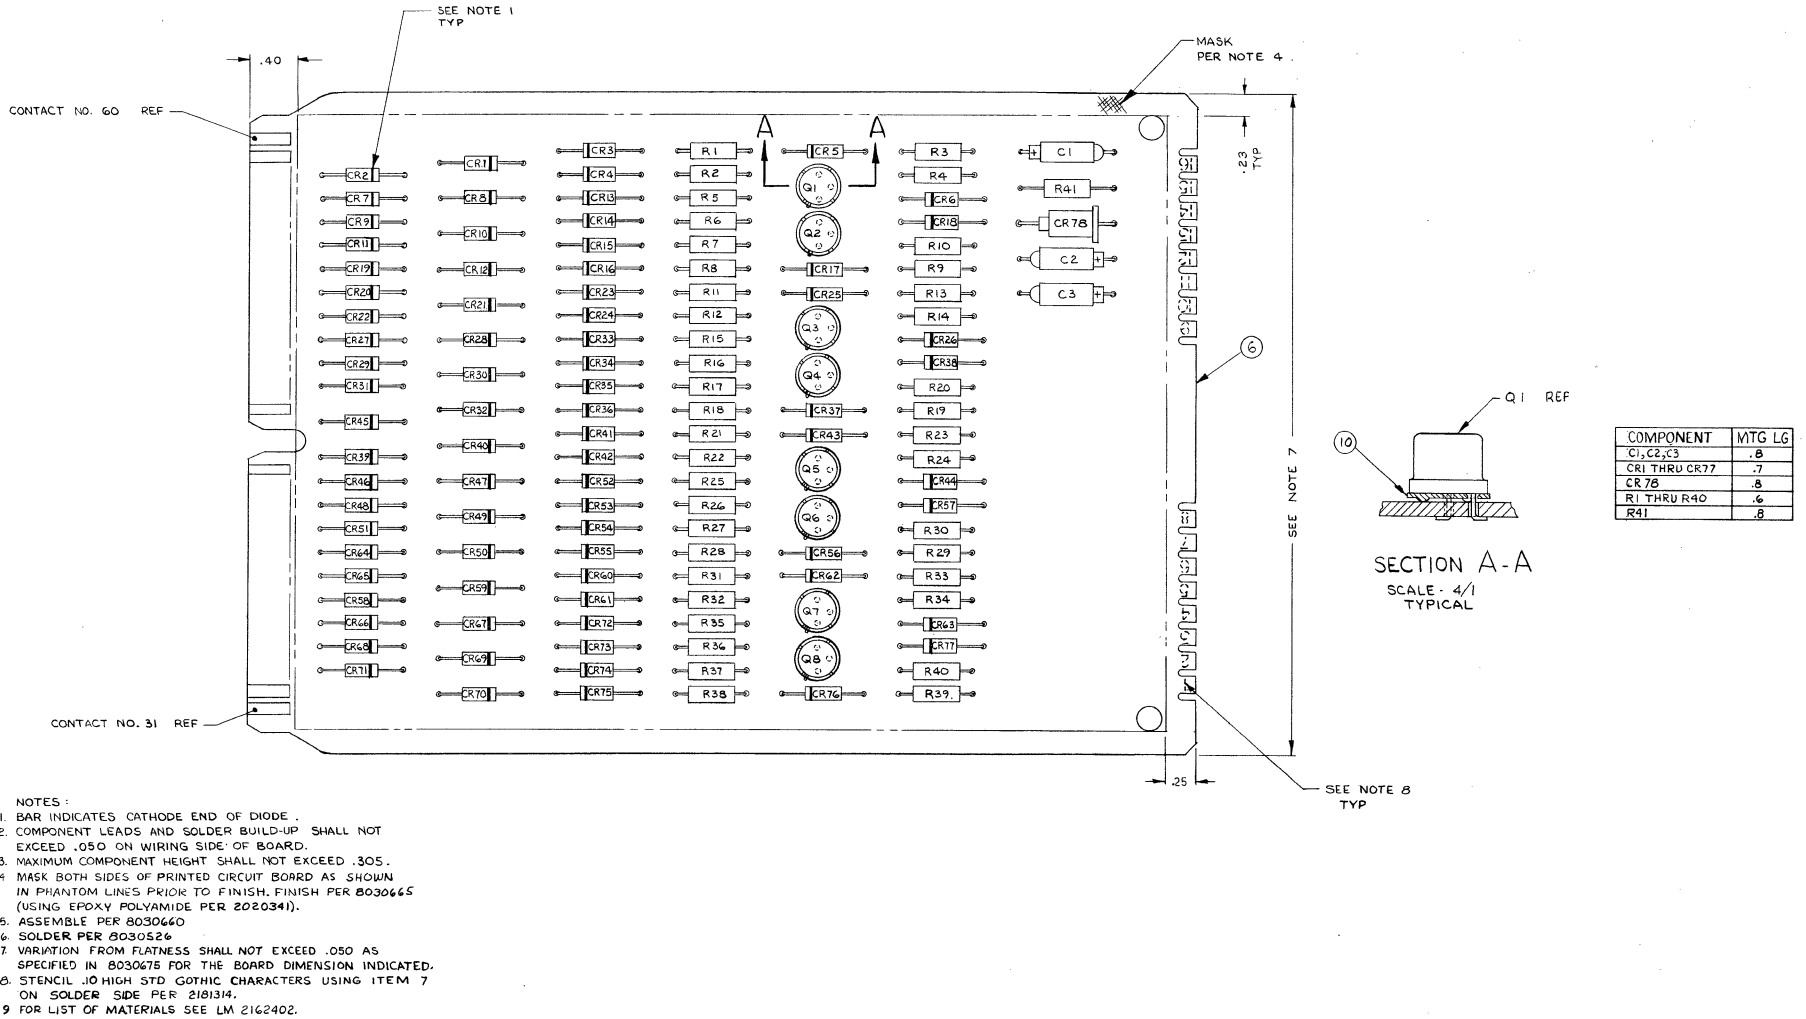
Low Speed Gate (Module 402), Assembly Drawing
